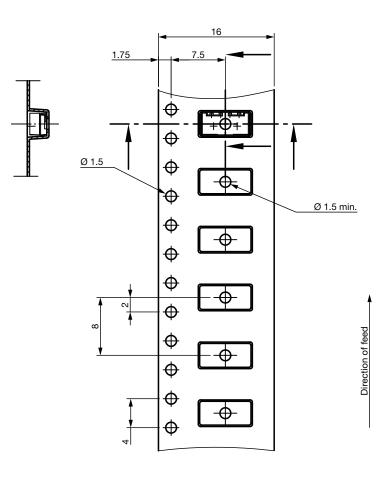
Issue: 4; 12.06.13
